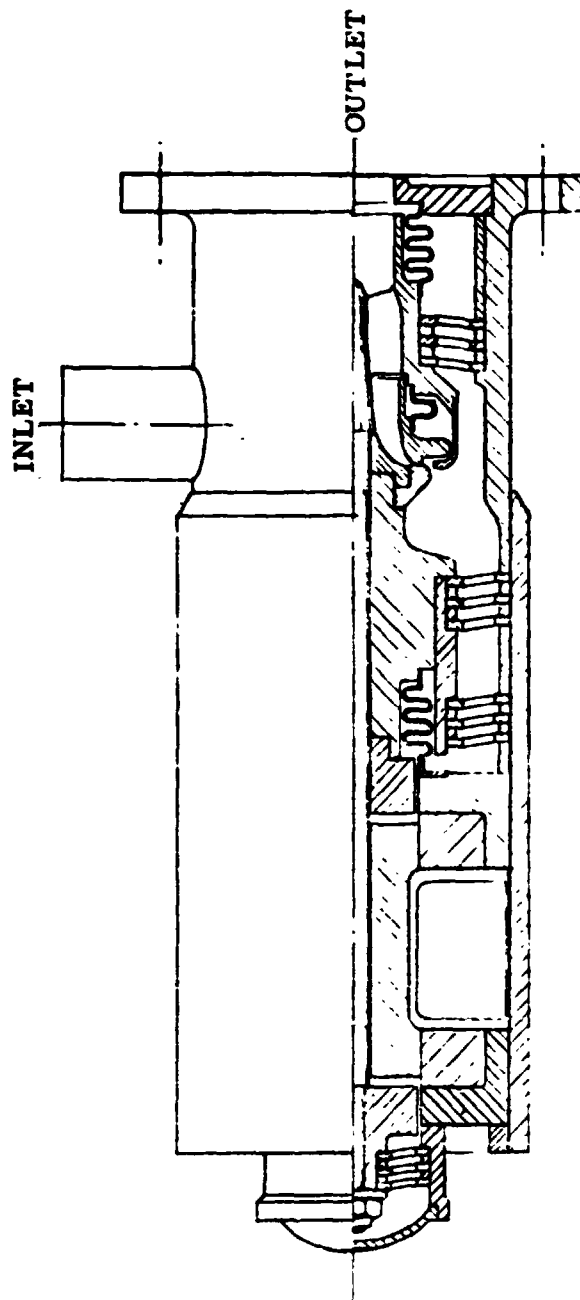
Double Acting Poppet Valve, Hard Seat, High Press. Solenoid Operated
